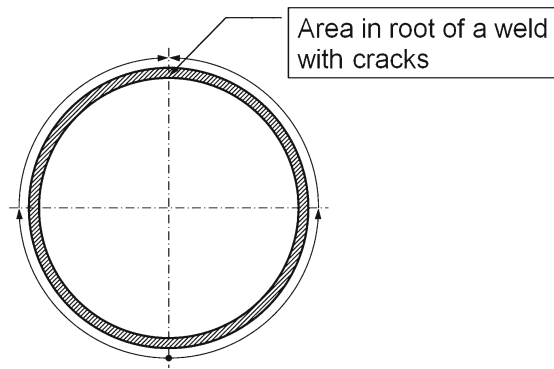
Scheme of welding pipes made of T91 steel.
